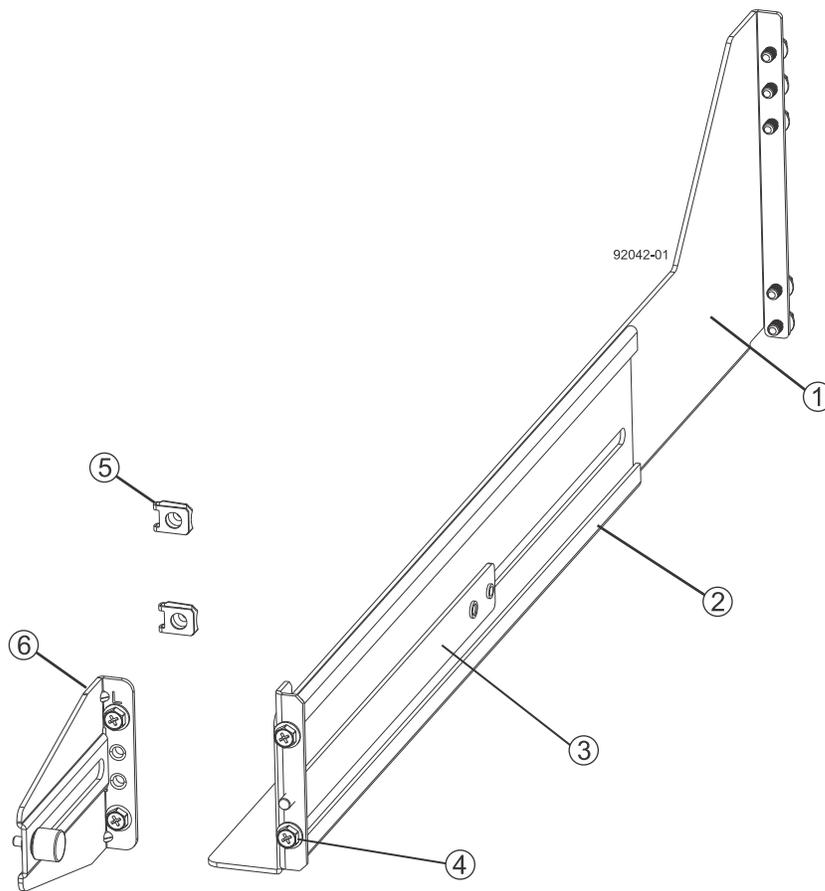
Attaching the Long Mounting Rails to the Cabinet
